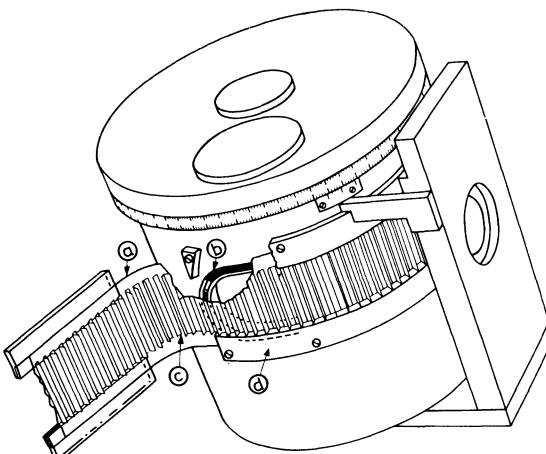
O-ring seal for large angular motion. After Louckes⁷⁸⁵ (*Courtesy of The American Institute of Physics*)
